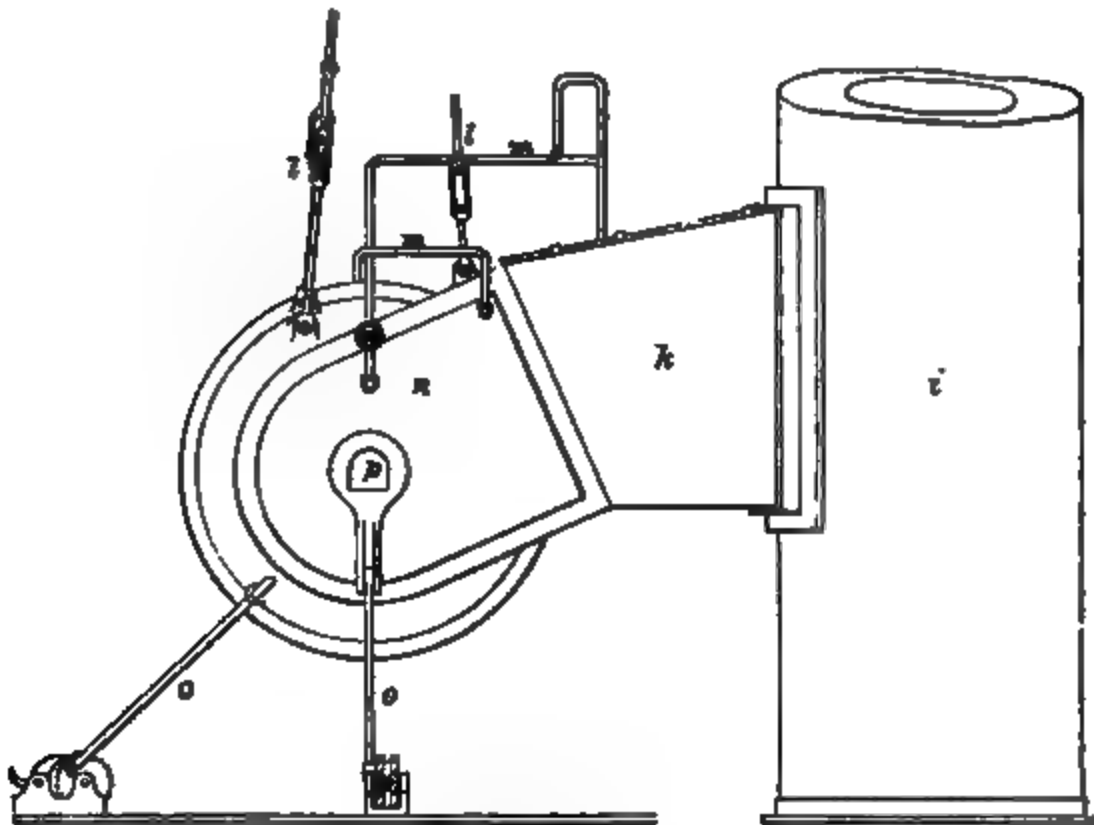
Danks' Puddling-Machine ; end-piece.
